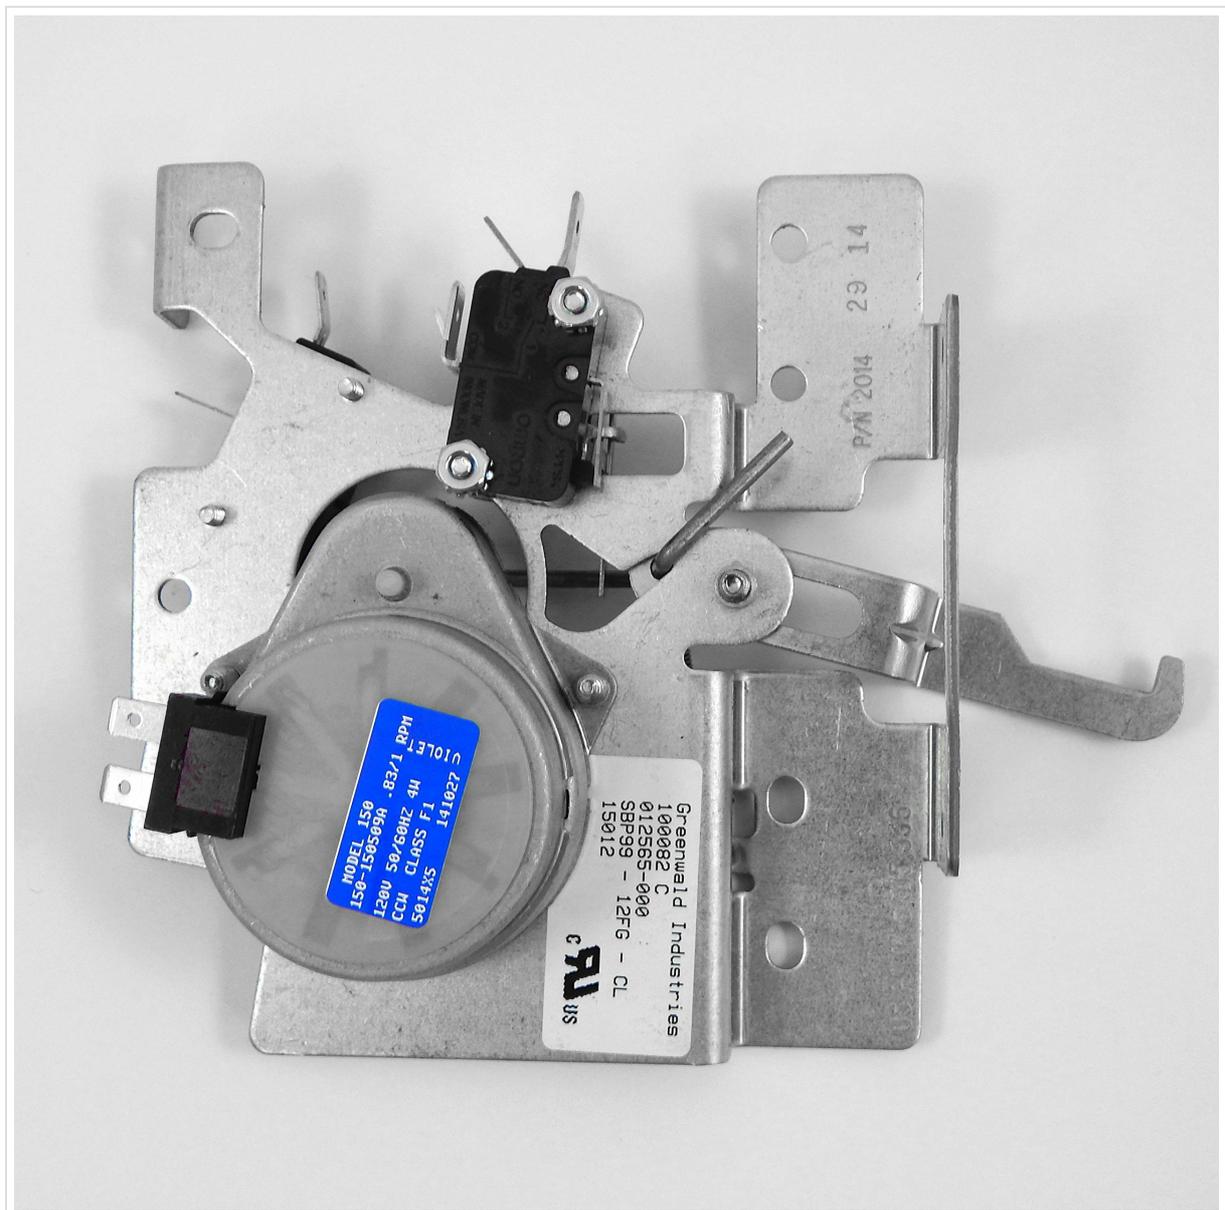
Viking Motorized Door Latch Part 012565-000. This image shows the overall appearance of the motorized door latch, highlighting its compact design and connection points for installation.
